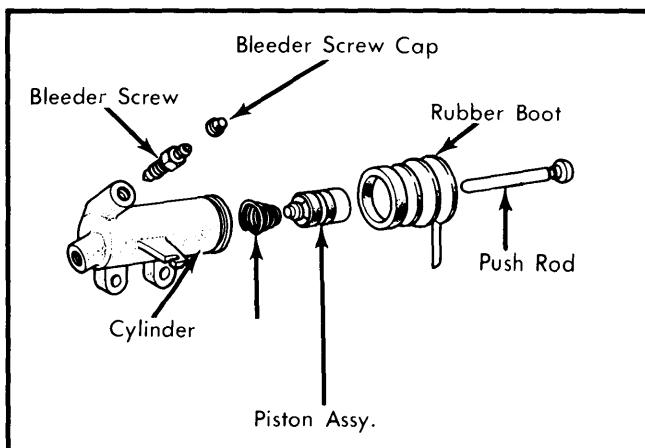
Exploded View of Slave Cylinder (External Design Differs Among Models)
